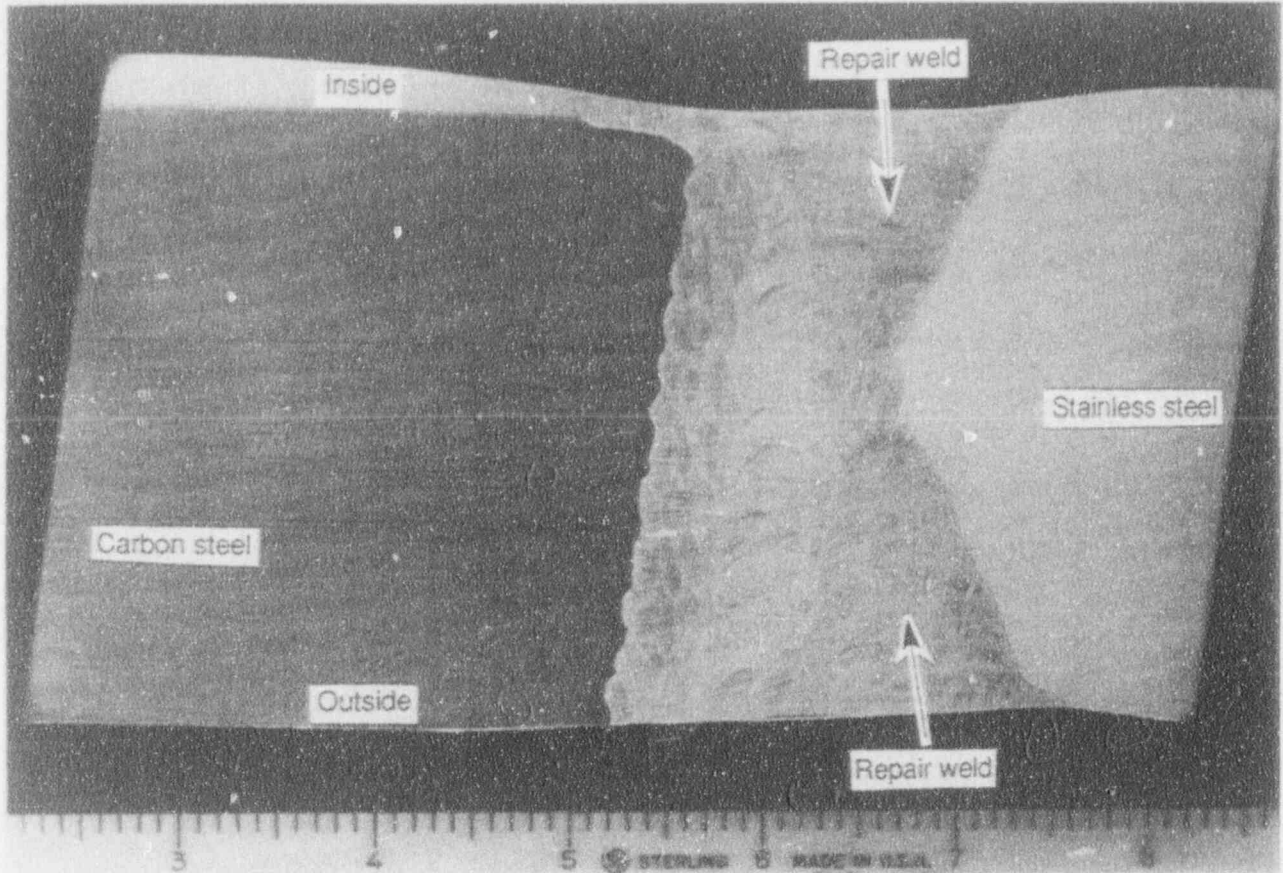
Photograph of bimetallic weld DP2-F33W
